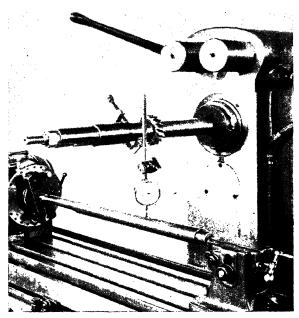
Dial gage as a surface gage. Dial gage (one division may be either 0.001 or 0.0001) clamped to the arbor of a milling machine. By moving the table of the milling machine on normal feed past the gage, a longitudinal traverse will be obtained. Rotation by means of the dividing head at the left will give a circumferential traverse. By combining the results of many of both movements, a complete analysis of the surface of the cylindrical part is obtained. (Brown and Sharpe.)
